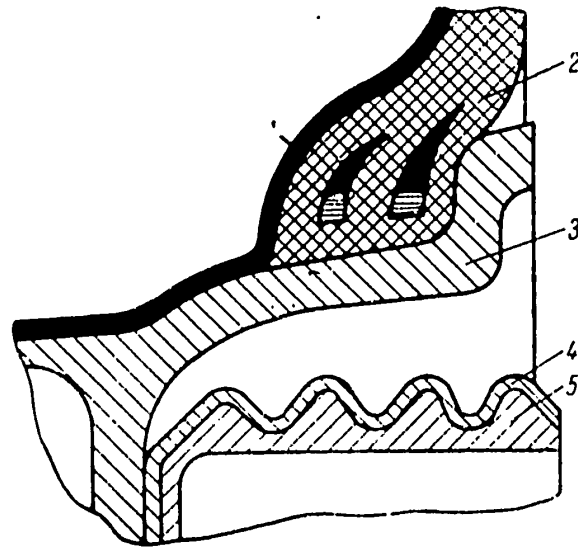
Modern Design of an Aircraft Wheel with an Insulating Air Layer between the Radiating Surface of the Bimetal Drum and Rim
